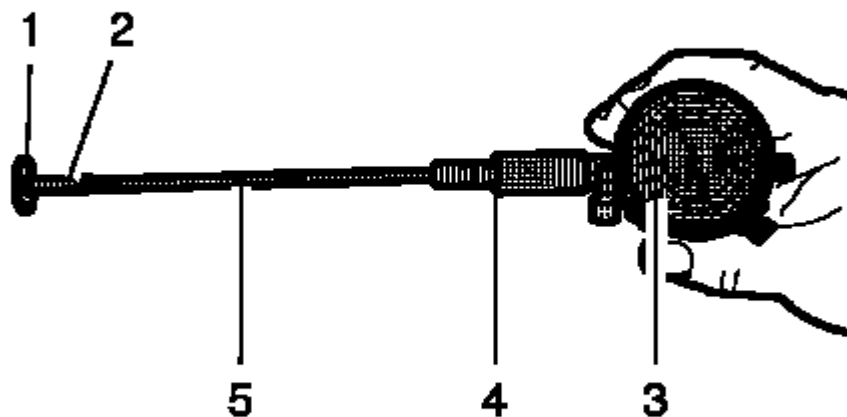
Checking Valve Stem To Guide Clearance Measurement
